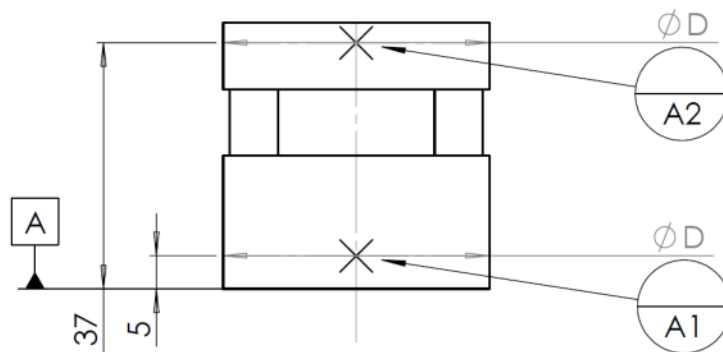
Datum definition of the multi cross-section workpieces.
